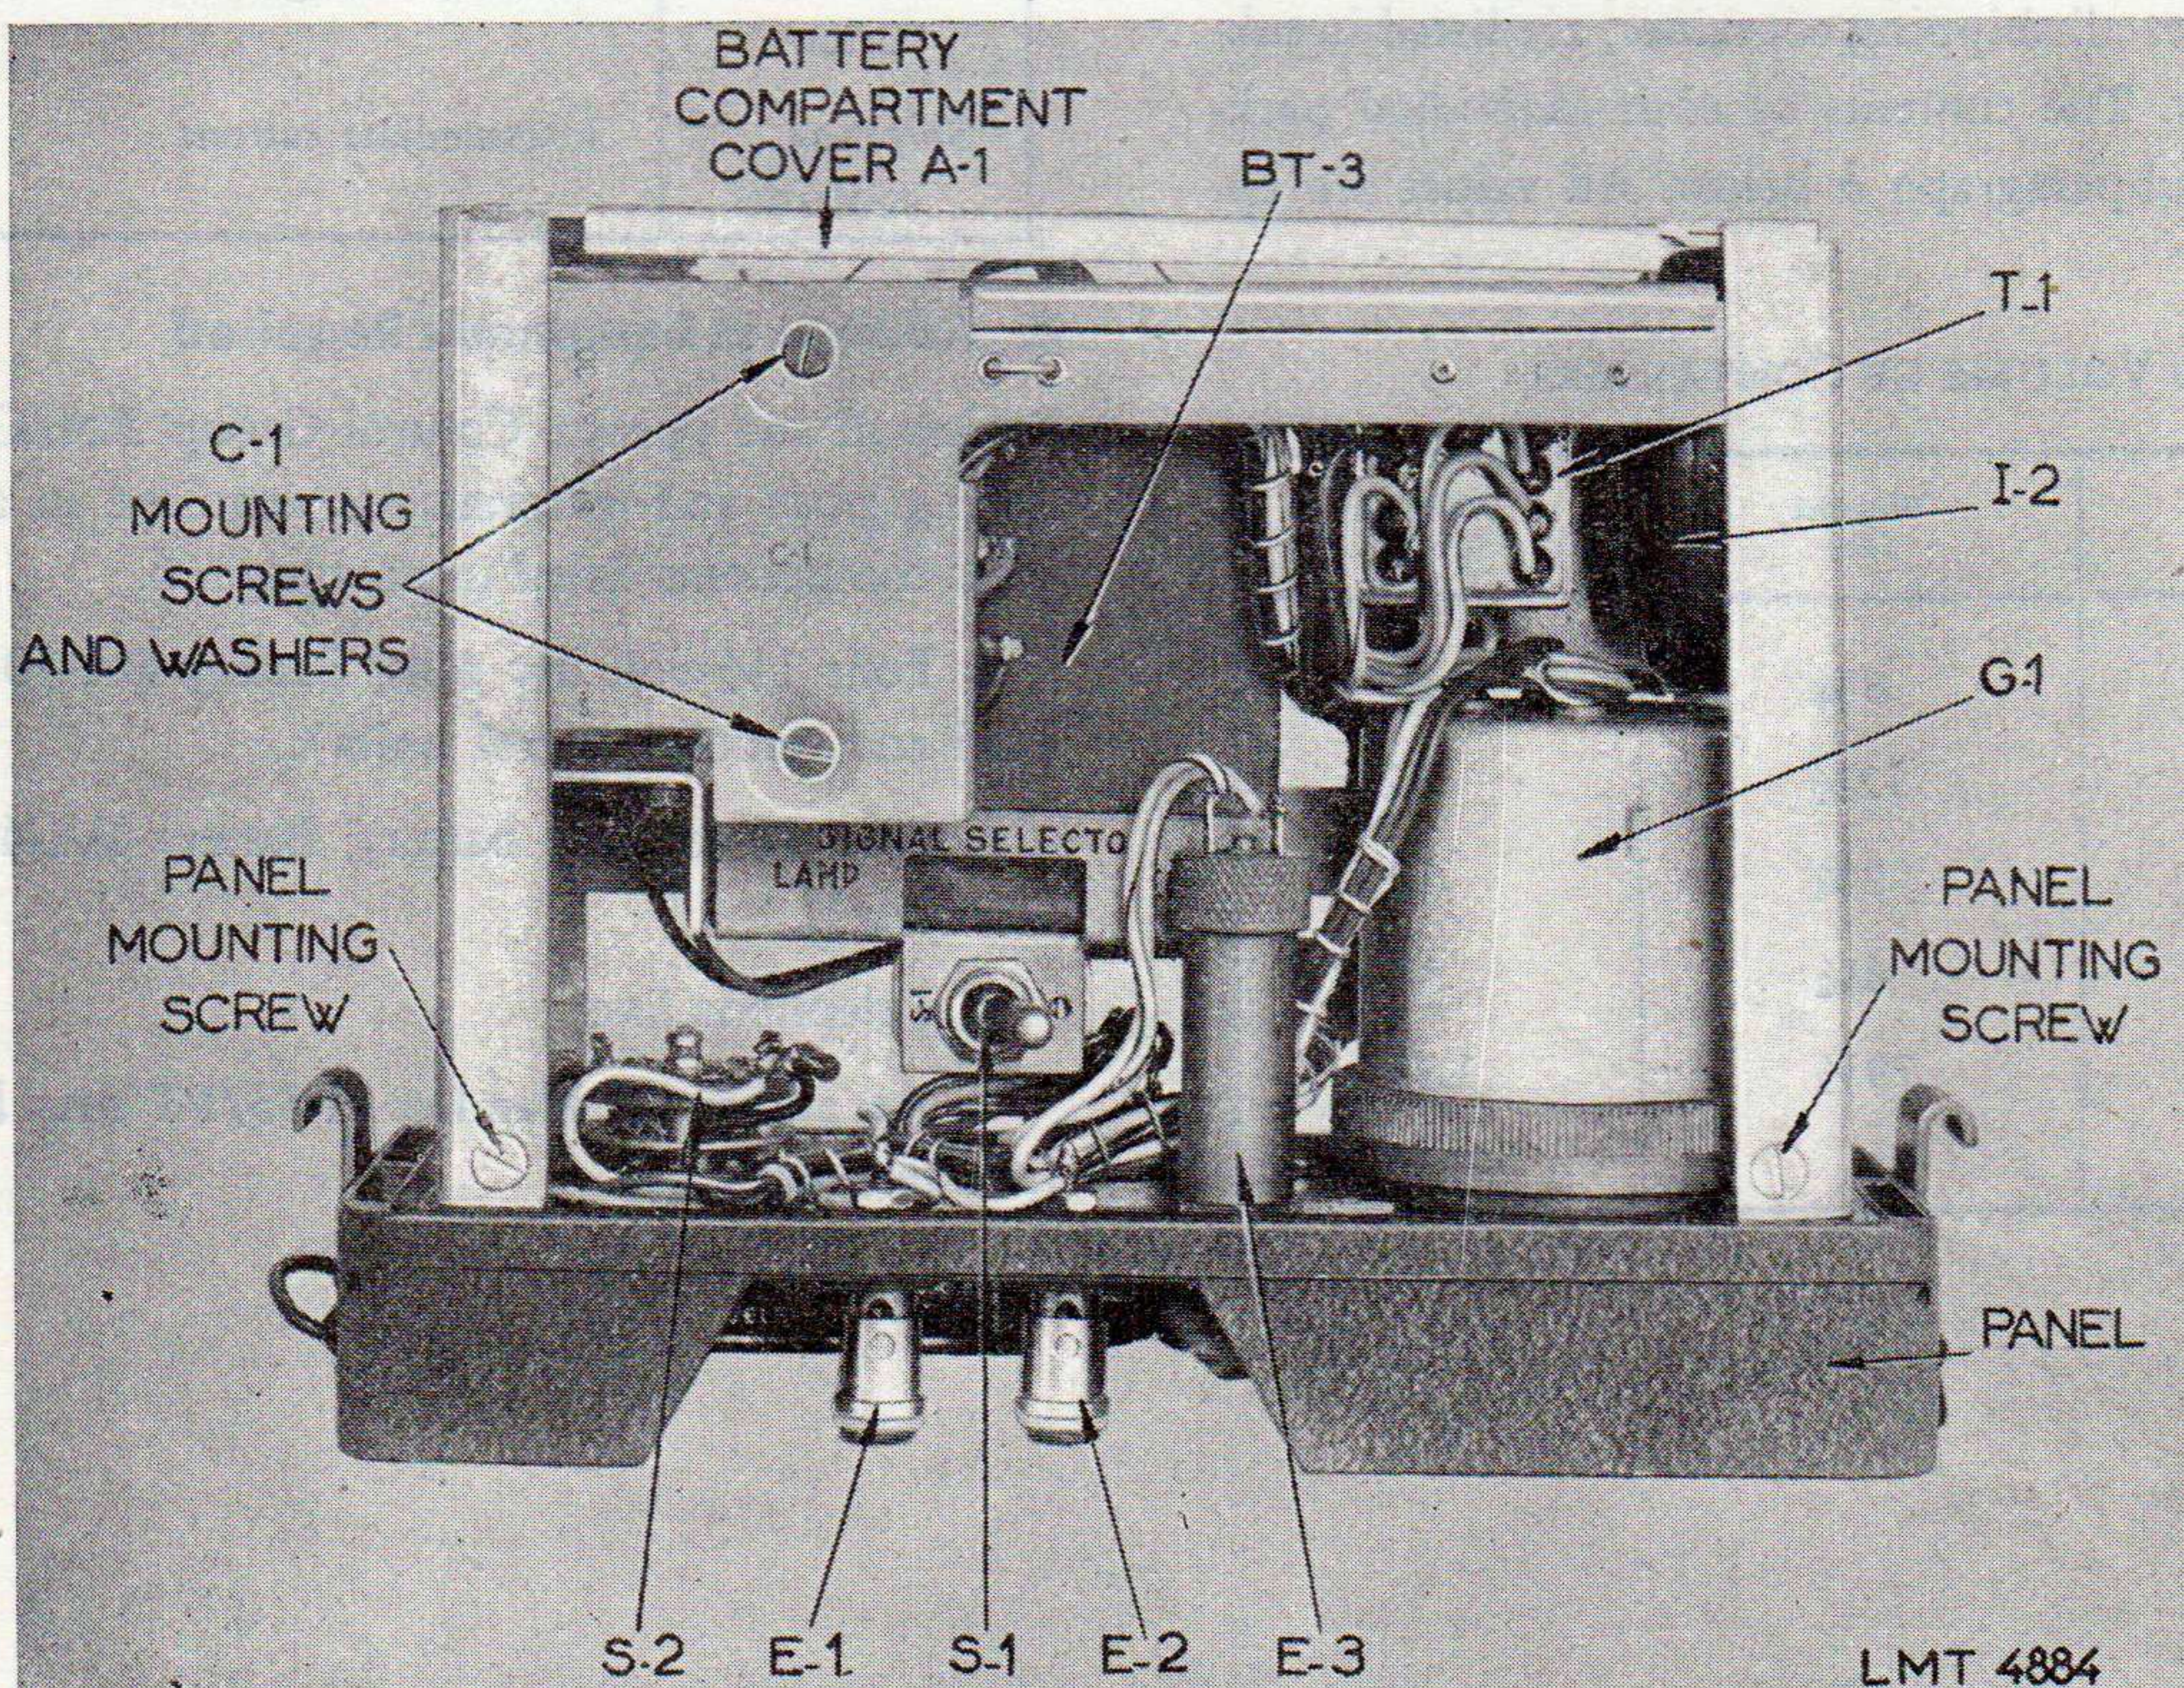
Remote Control C-433/GRC, panel-and-chassis assembly, cover removed, top view of chassis.
